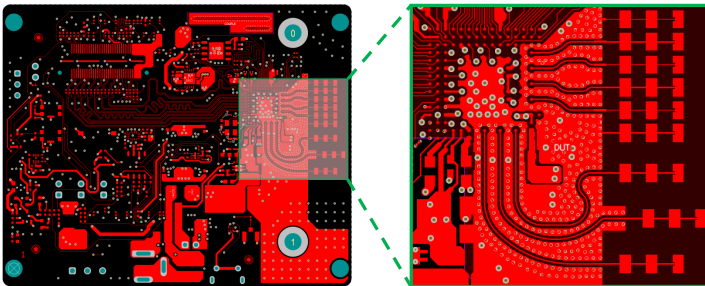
PCB layout of TI AWR2243 evaluation module [52].
